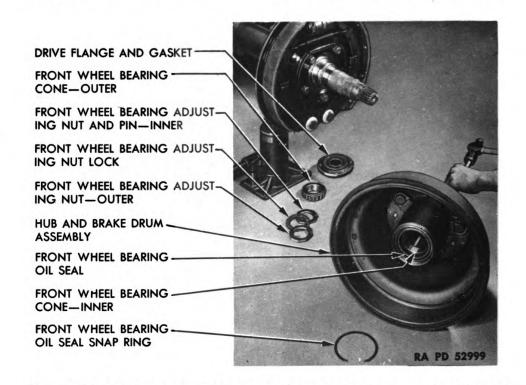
Removing Front Wheel Inner Bearing and Oil Seal
